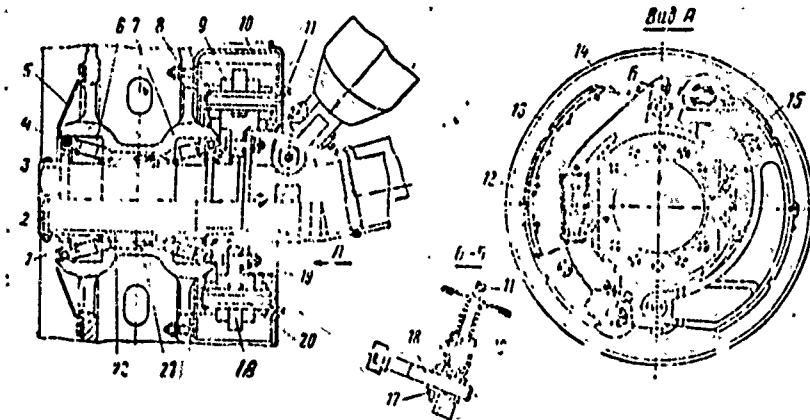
Part for Fastening Main Gear Leg Wheel:
